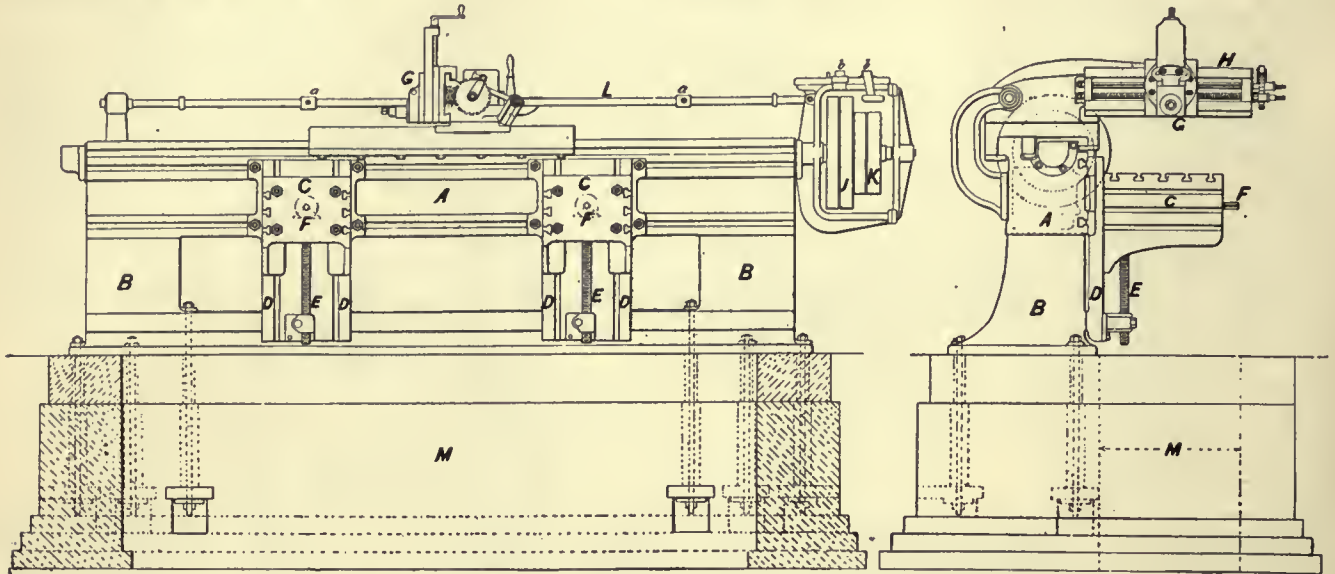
20-in. Side Planing Machine. (G. Richards & Co., Ltd., Manchester.)
